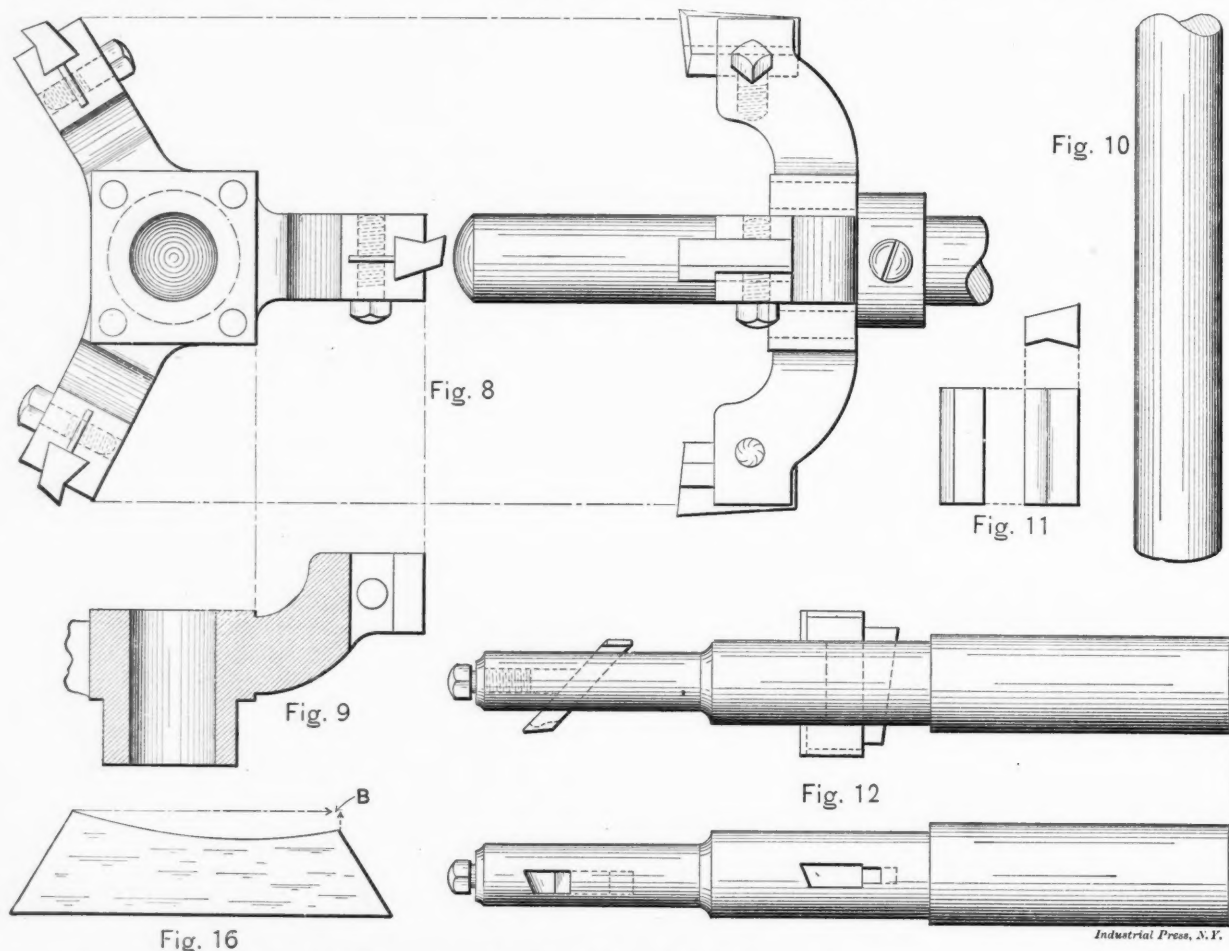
Turret Tool Holder for Finishing Taper Surface on inside of Pulleys.
